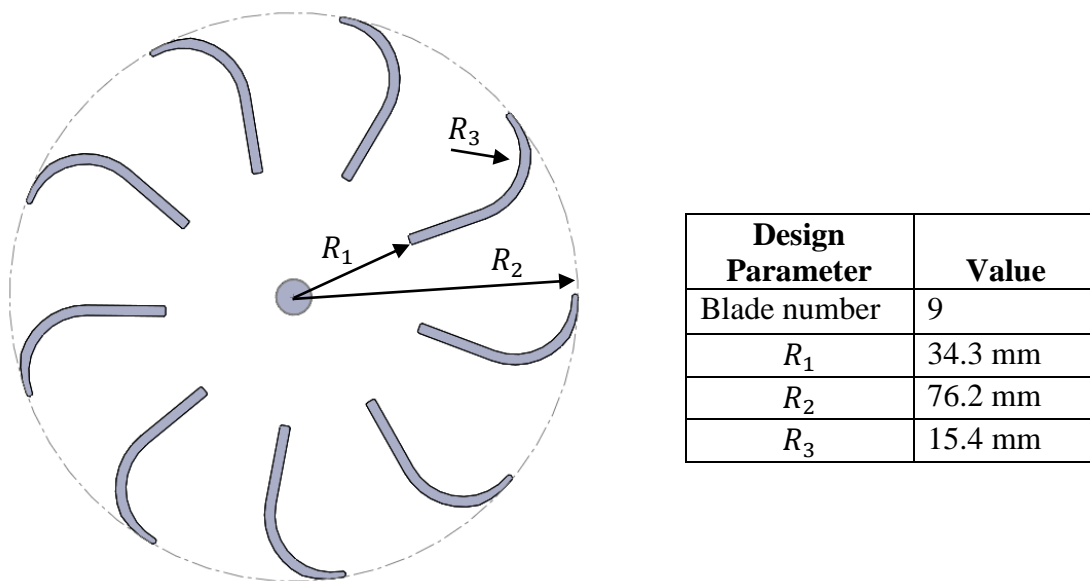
Geometry of the initial impeller and casing design provided by KW River Hydroelectric Co.
